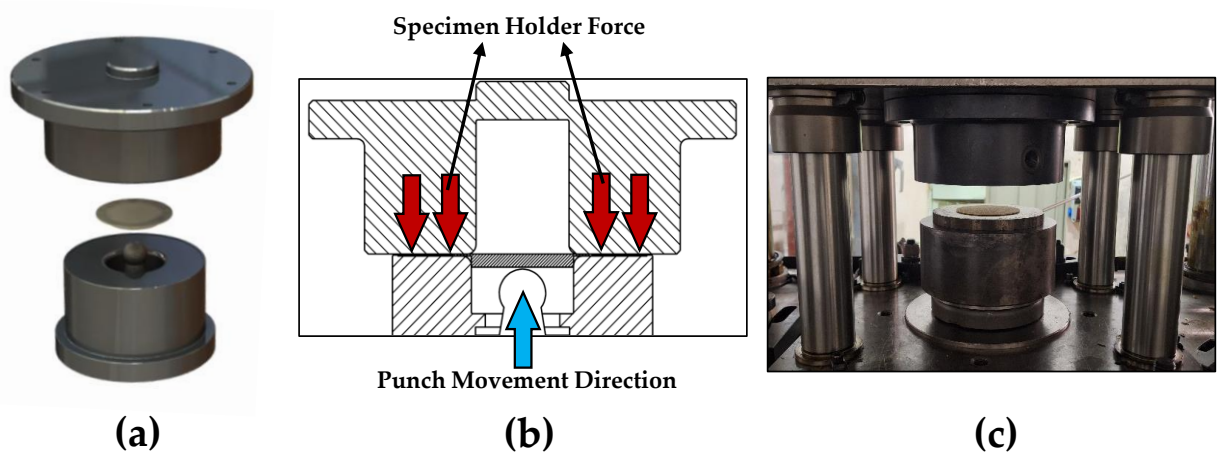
(a) Exploded view, (b) sectional view and (c) literal view of the experimental setup for Quasi-static Penetration Test
